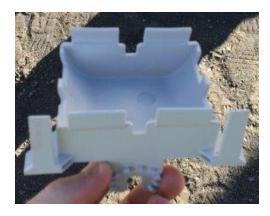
Tool for Attaching Rechargeable Communications Module (SI# 8004881)
